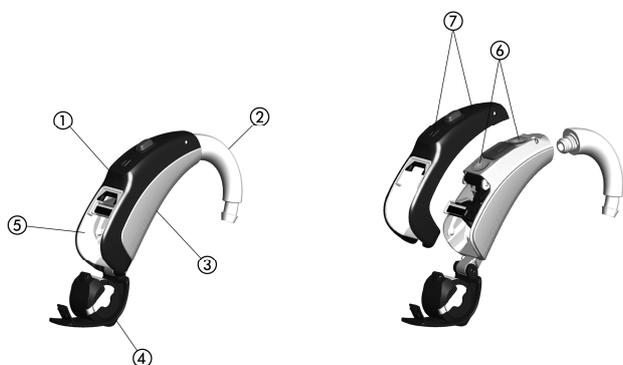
a) Spice+ H2O housing b) Explosion view of the Spice+ H2O housing
